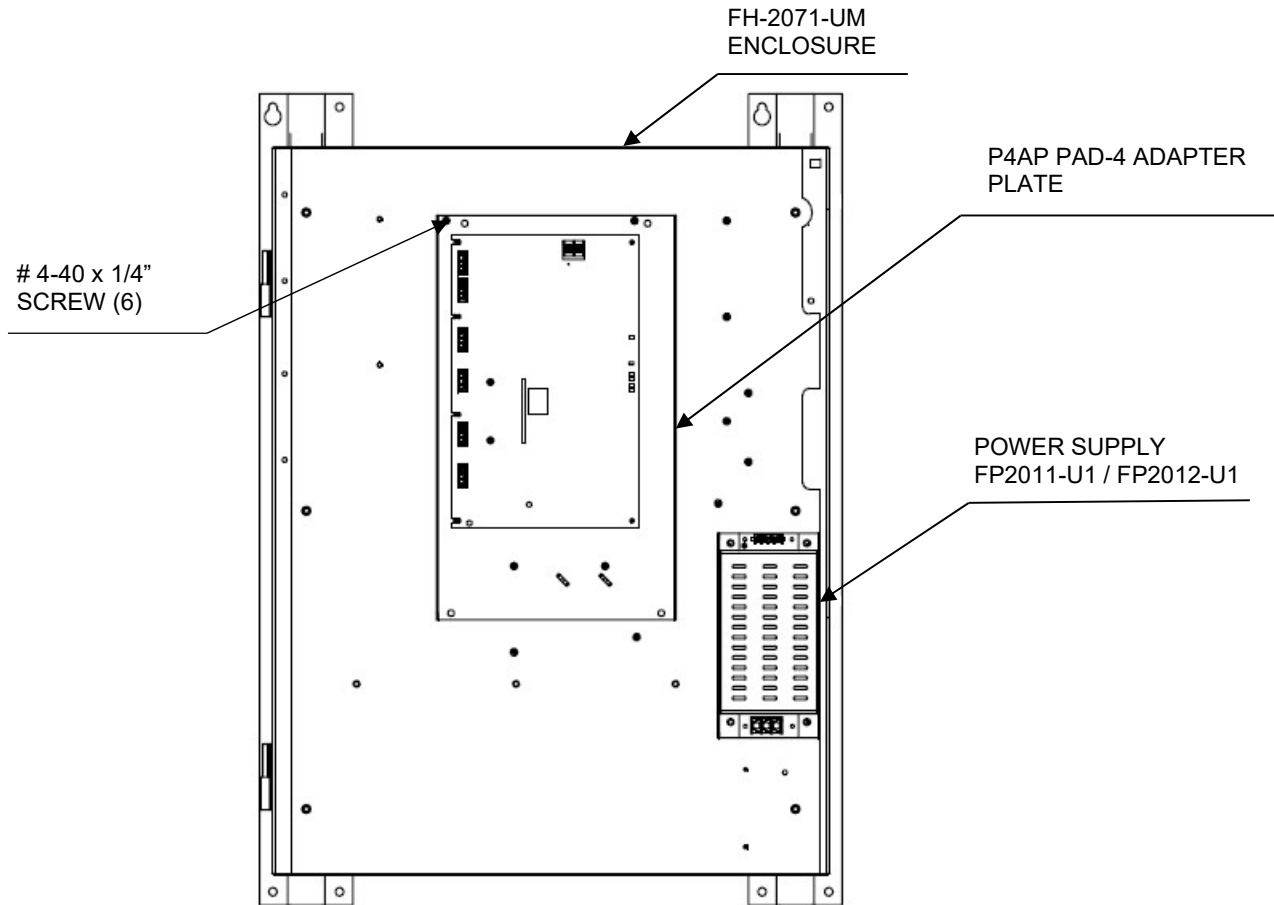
Mounting the Adapter Plate in a FH-2071-UM (Black)
